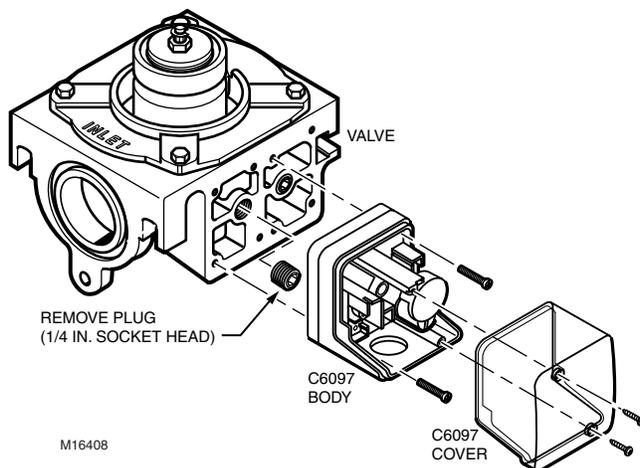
Connecting C6097 Pressure Switch to Valve.
